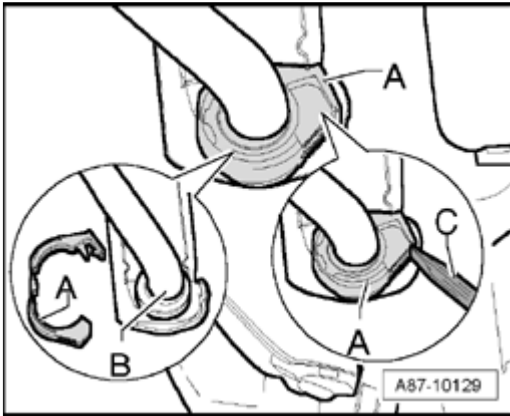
Identifying Coolant Pipes, And Plastic Clamp
